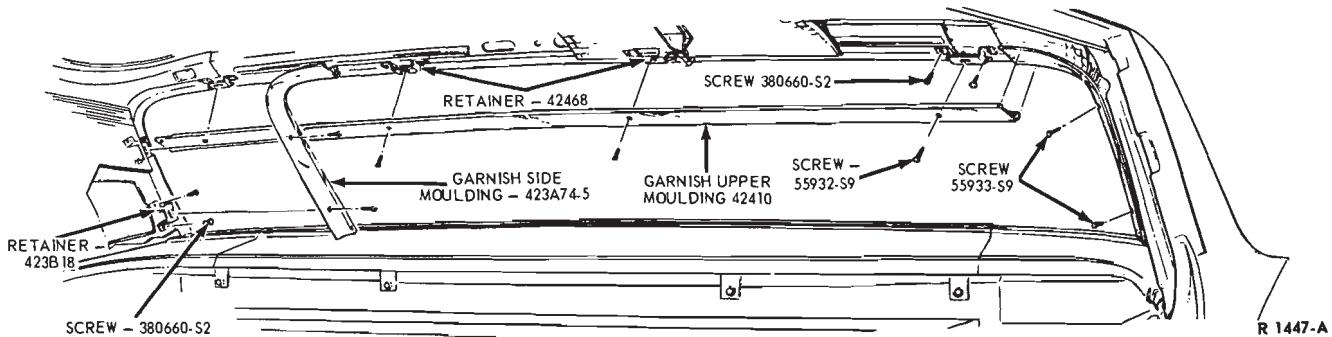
Typical Back Window Garnish Moulding Installation—Continental Mark III Shown
